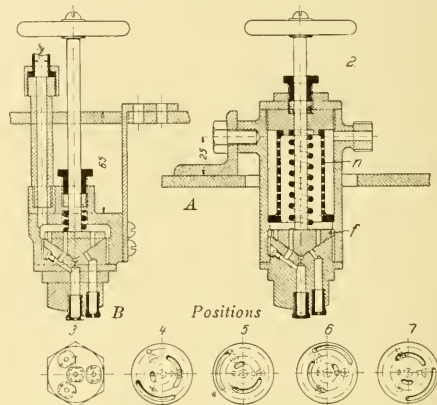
ADJUSTABLE BURNER FOR LIQUID FUEL
